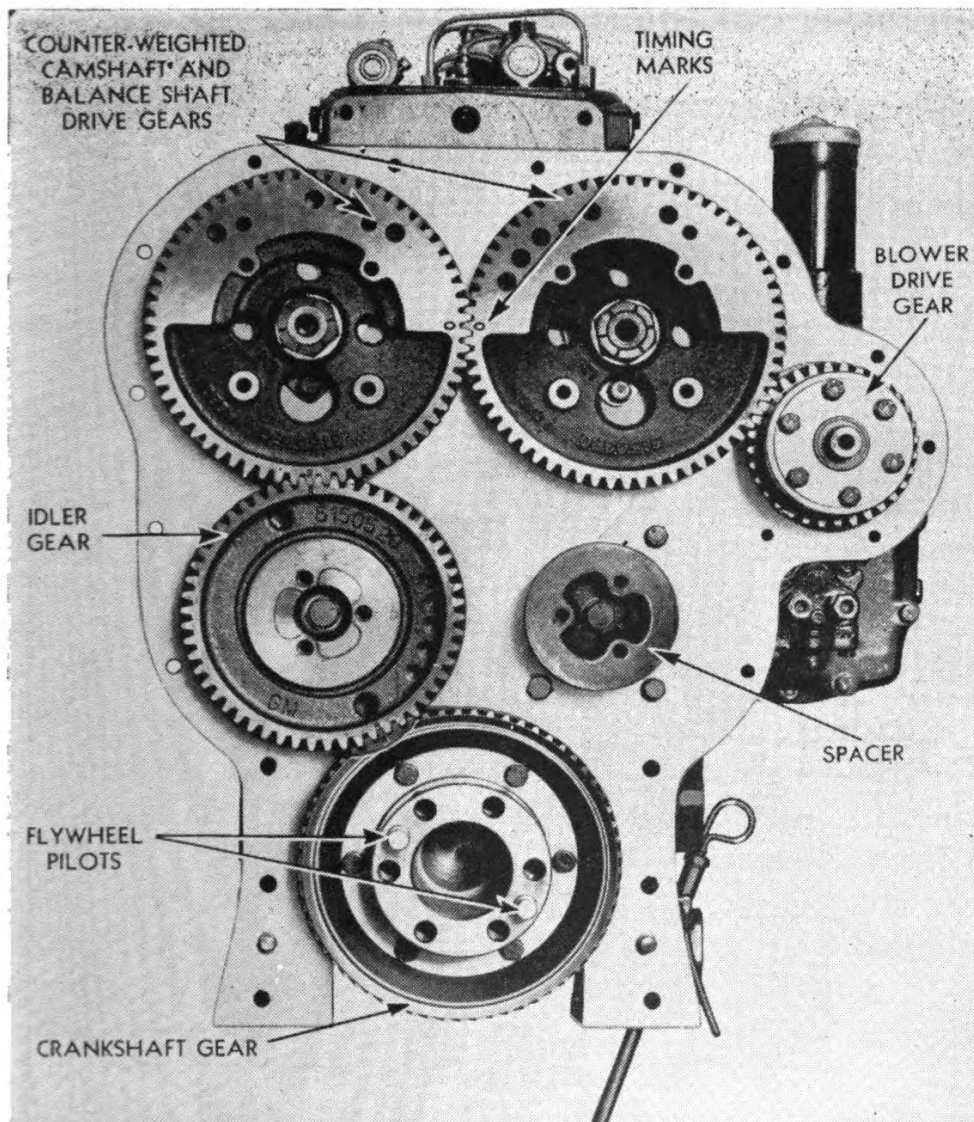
Camshaft and accessory drive (GM 6-71).
